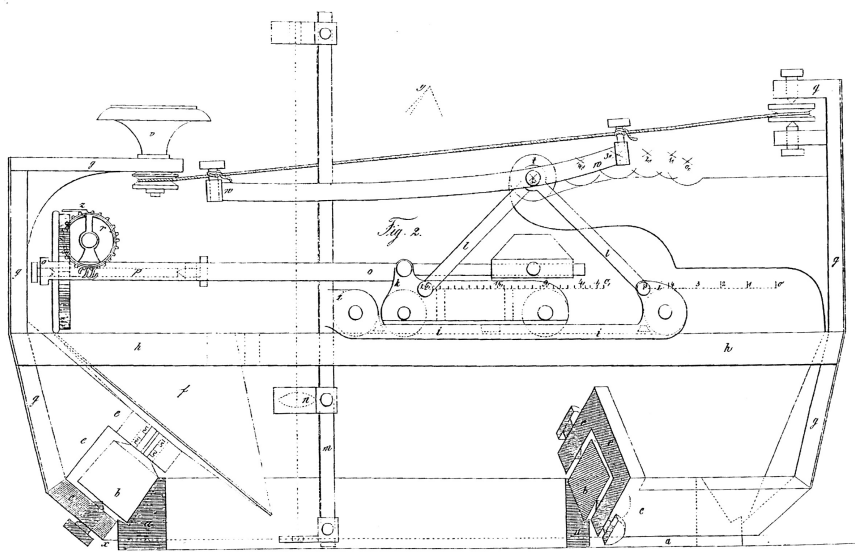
Side view of the Gierer planimeter [Gier1854]
